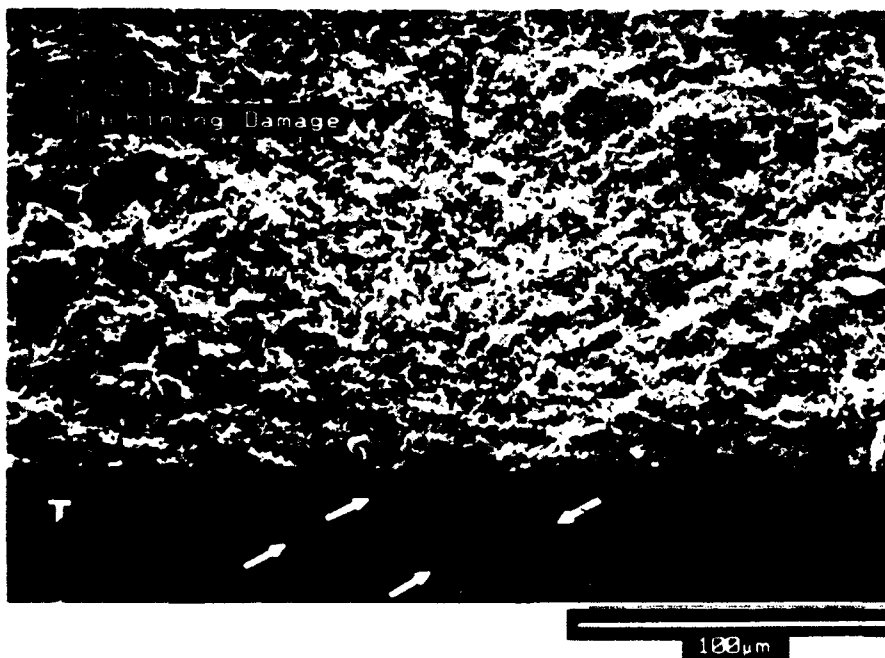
Fracture surface of a specimen after 100 hours at 1000°C. White arrows indicate the machining damage on the tensile surface. Black arrow heads outline the semi-elliptical cracks that were created. Large black arrows outline the mirror region. Fracture stress = 1552 MPa. "T" denotes tensile surface.
